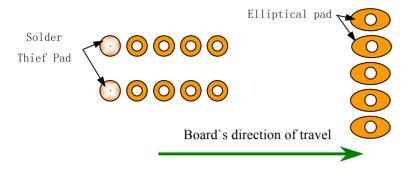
Solder pad alignment relative to board's direction of travel through the wave soldering equipment
